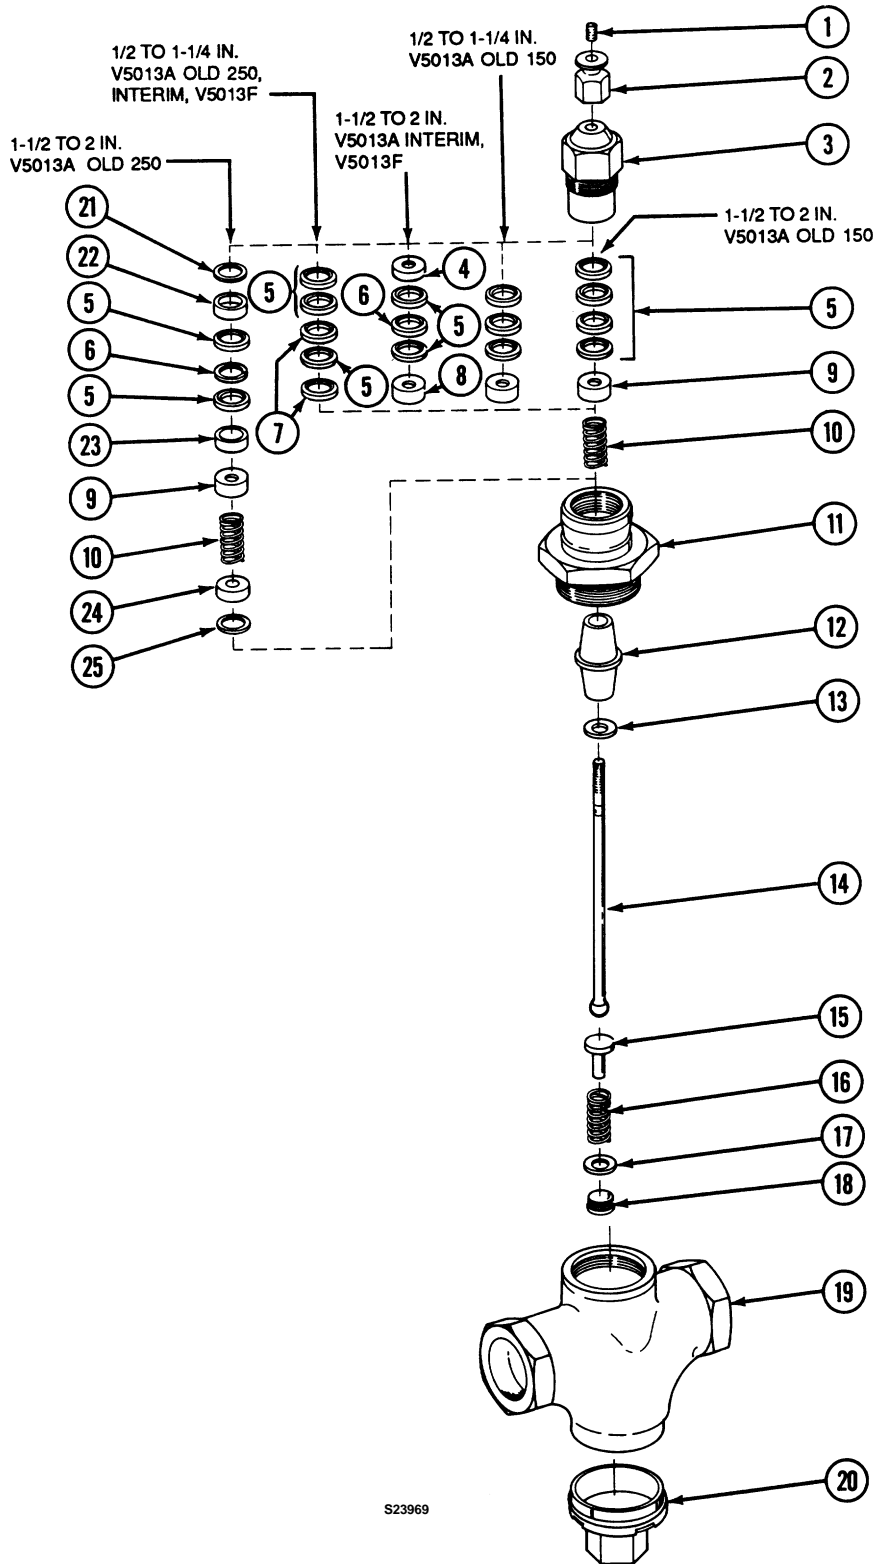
V5013A and F Threaded Body Three-Way Valves—Exploded View.
